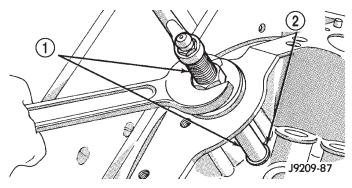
Burnishing Distributor Driveshaft Bushing 1 – SPECIAL TOOL C-3053 2 – BUSHING
